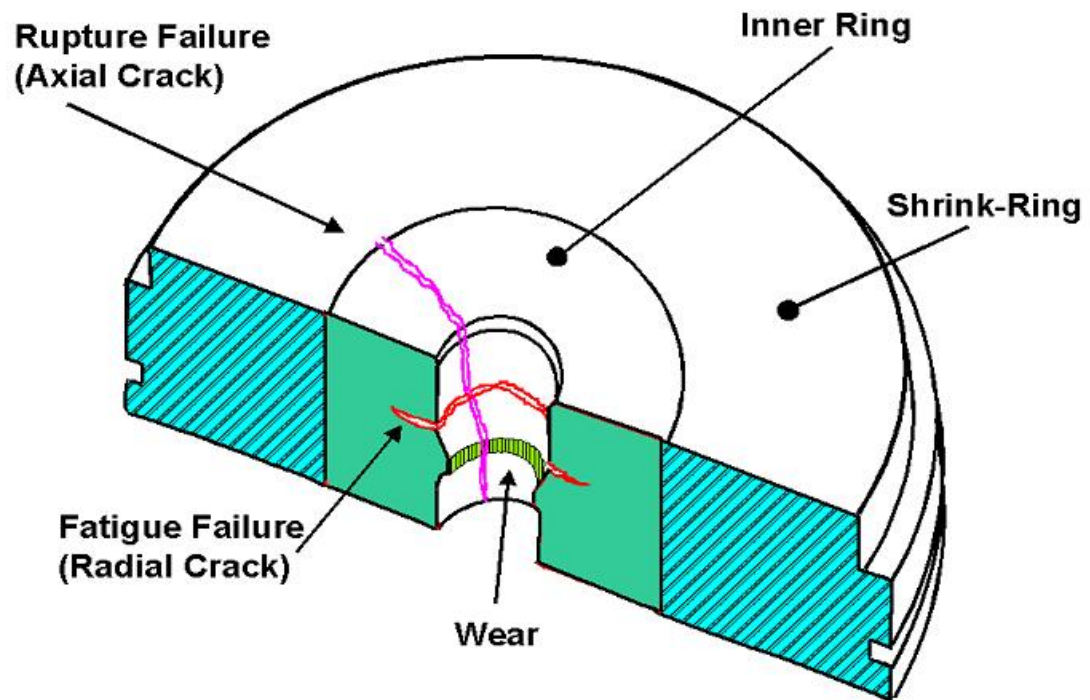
Typical tool failures in cold extrusion (*Lunge*)
